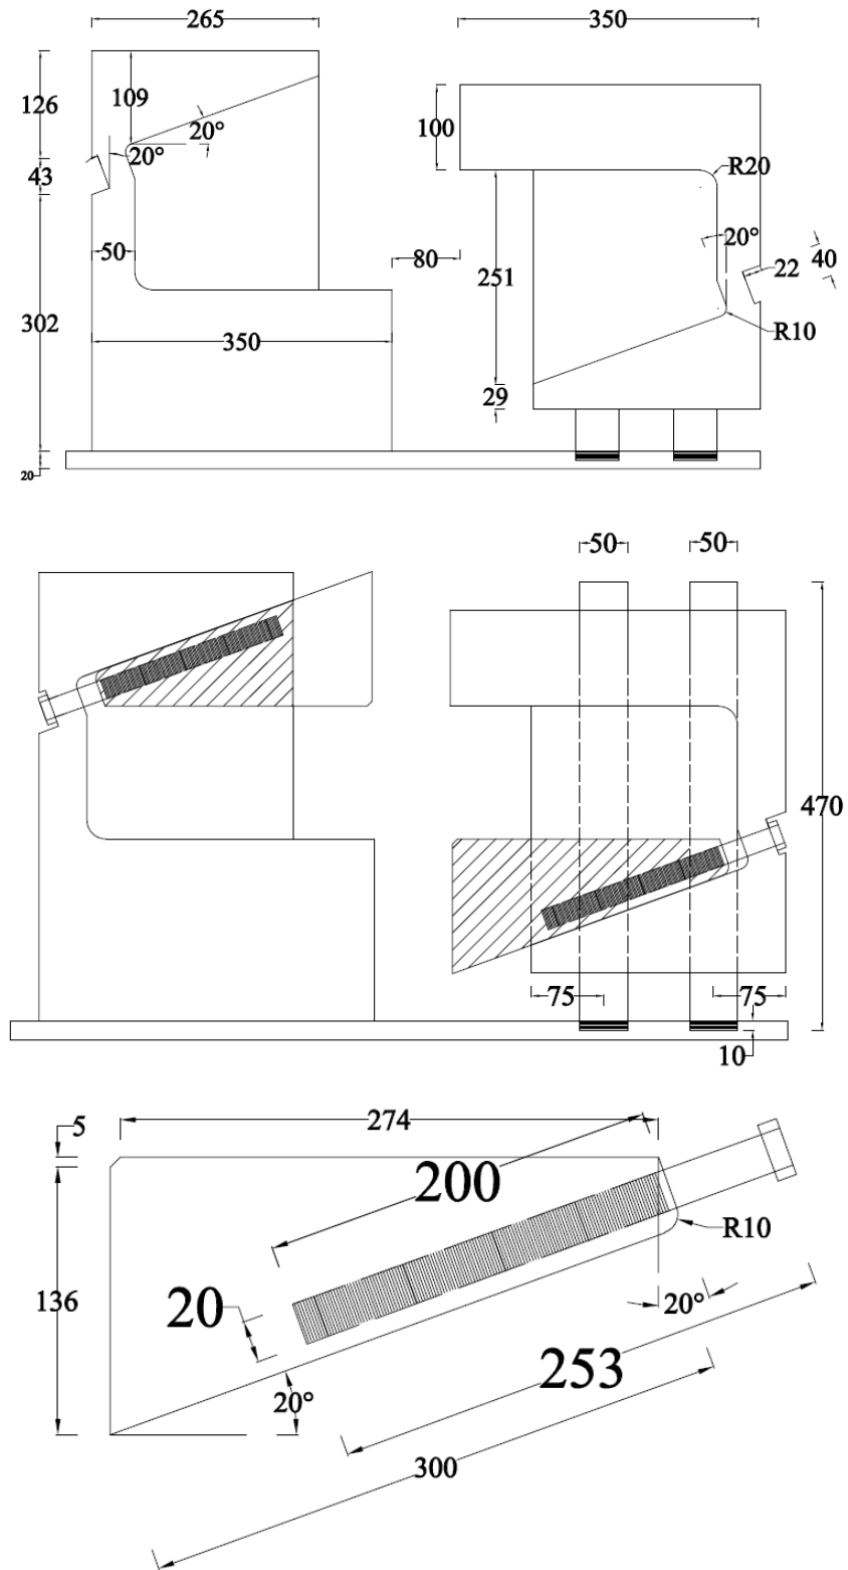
A: Details of Iosipescu Fixture (dimensions in mm)
